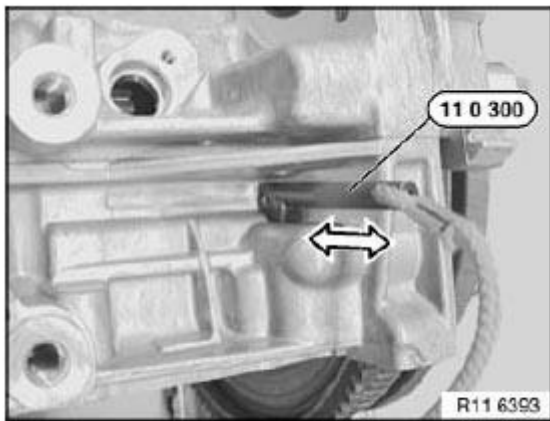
Securing Engine In Firing TDC Position Of Cylinder No. 1 Using Special Tool 11 0 300
